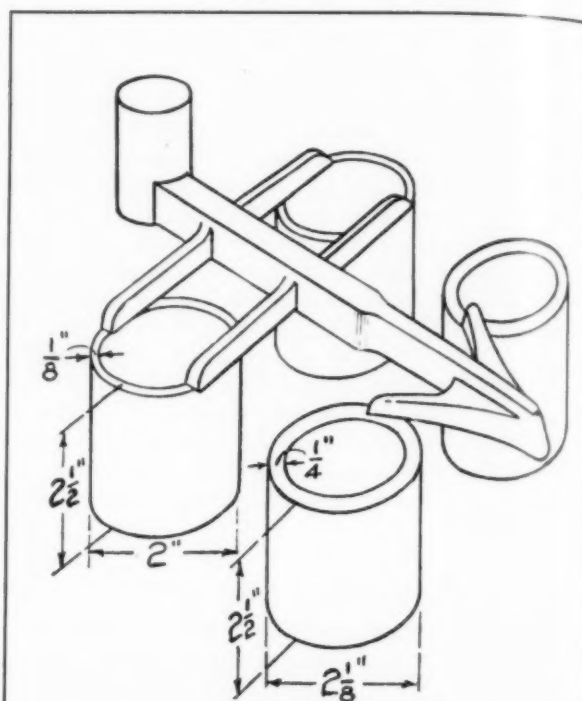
Schematic representation of a casting of specimens for hydraulic tests.
